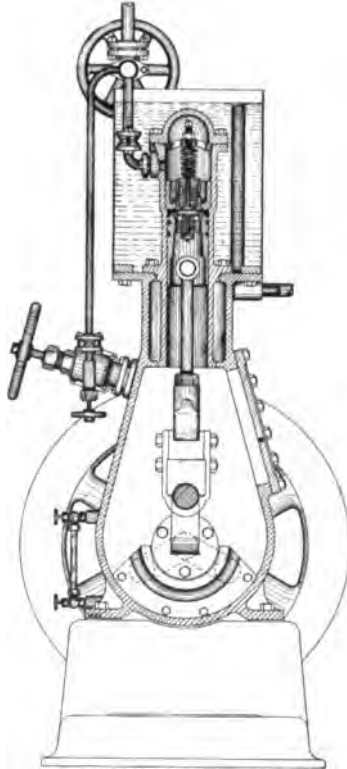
THE CHALLONER TRIPLE CYLINDER, SINGLE-ACTING COMPRESSOR, END VIEW.
